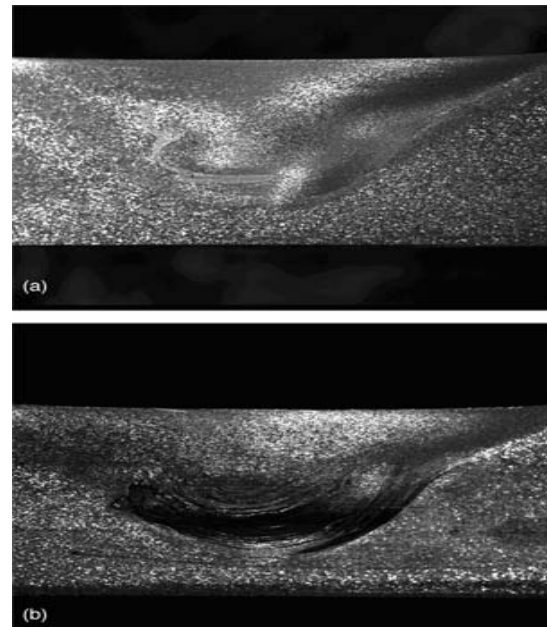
Cross sections showing fully consolidated weld zone. FSRP zone is 3/8-in (9.52 mm) thick: (a) SiO₂ and (b) TiO₂.
